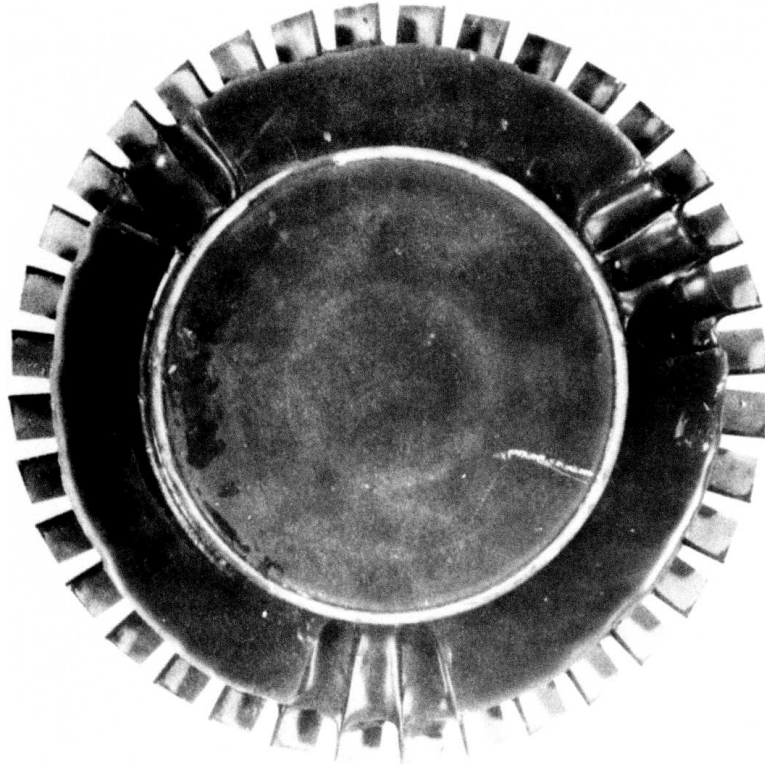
Wax Potted Rotor Prior to Finish Machining
